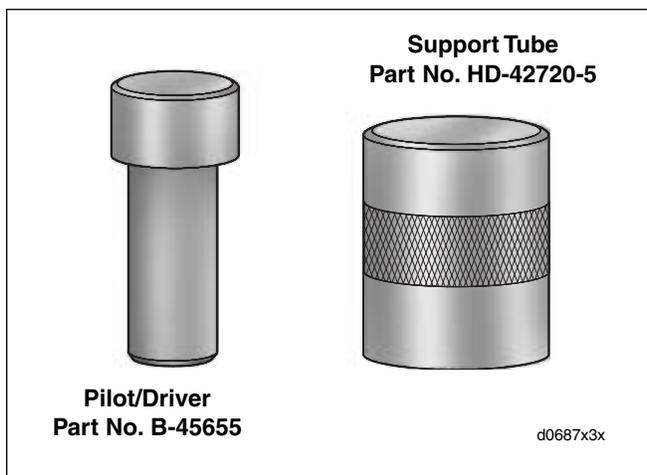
Crankshaft/Sprocket Shaft Bearing Pilot/Driver and Support Tube
